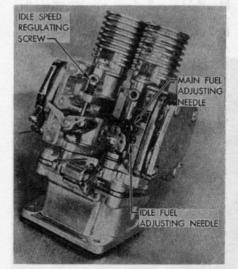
View of dual carburetor installation on Models MC-40 and MC-70 showing carburetor adjustment points. Main fuel adjusting needle and idle fuel adjusting needle are on rear side of left carburetor.
